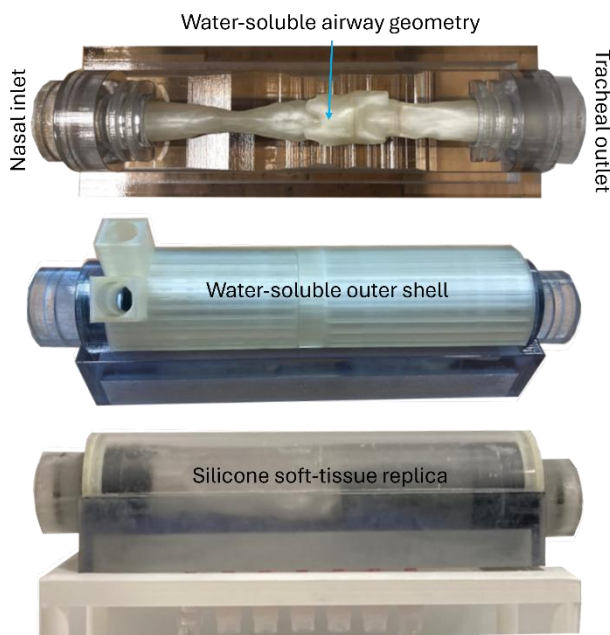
Fabrication steps of the airway phantom (images arranged top to bottom). (A) Solid base of the model with the water-soluble printed airway template inserted into the casting assembly. (B) Assembled mold showing the outer water-soluble components with integrated inlet and outlet ports for silicone casting. (C) Final silicone airway phantom after dissolving the water-soluble components - a flexible silicone sleeve surrounds the hollow airway lumen.
